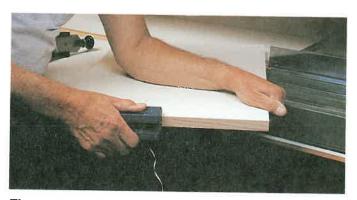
Trim tape on straight panel edges with an edge trimmer. (Chuck Davis Cabinets)
